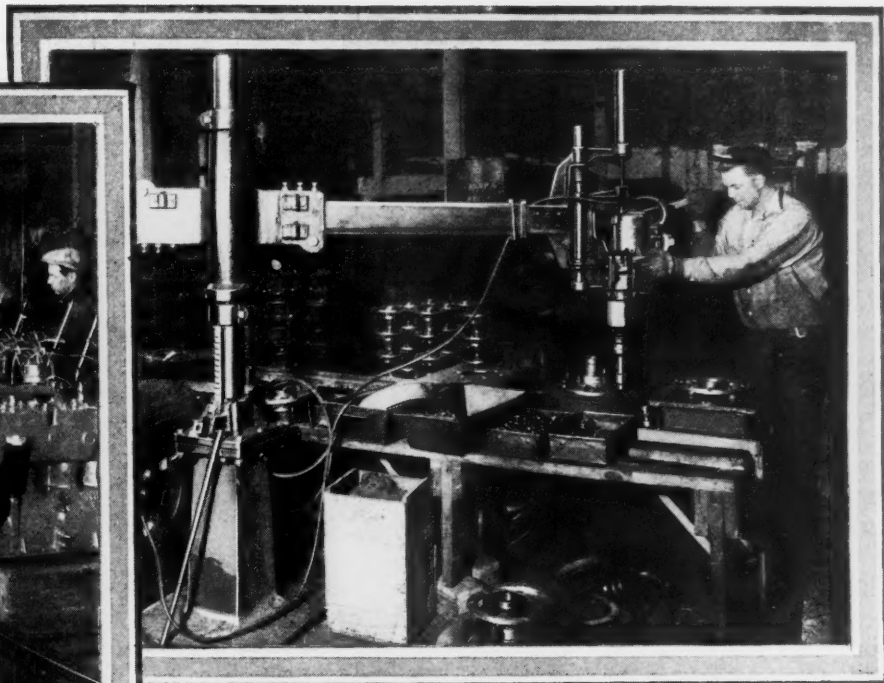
Assembling Brake Drums, Using a Heavy-duty Electric Nut Setter with Gear-case and Bracket for Mounting it on a Supporting Stand
